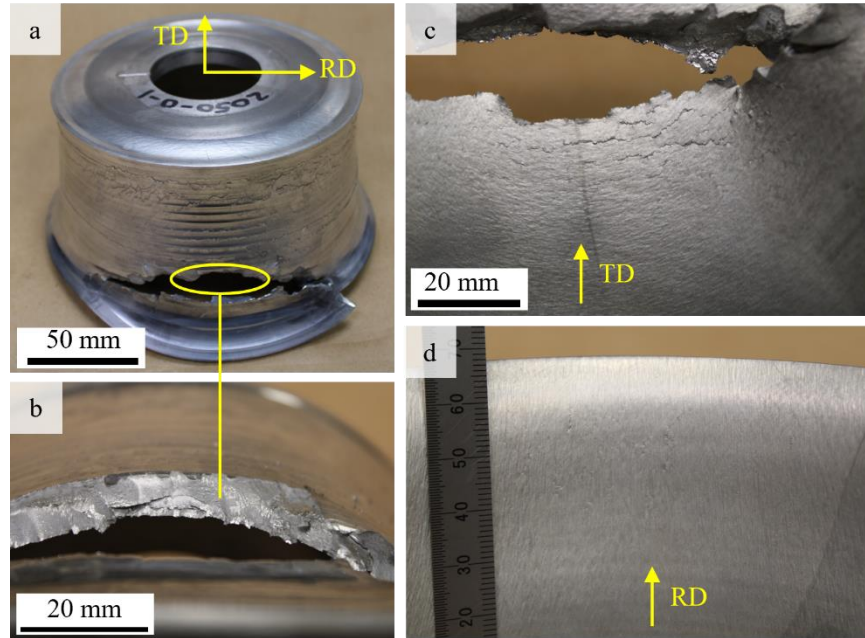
Al 2050 spin formed part exhibiting (a) flange failure, with (b) a fracture surface not showing beachmarks. The orange peel and microcracks differed between (c) the TD and (d) the RD of the original plate.
